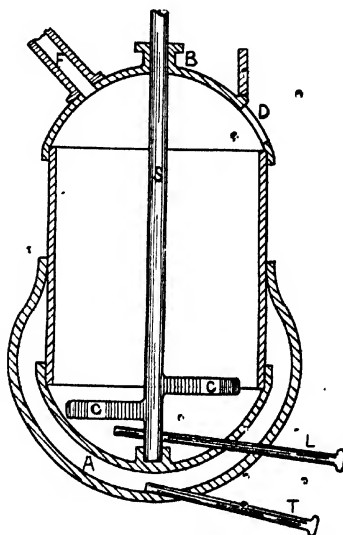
Steam-heated oil-boiler. A, steam jacket; B, centre for vertical shaft; C, agitators; D, oil inlet; F, flue; L, air into oil; S, vertical shaft; T, steam inlet.
